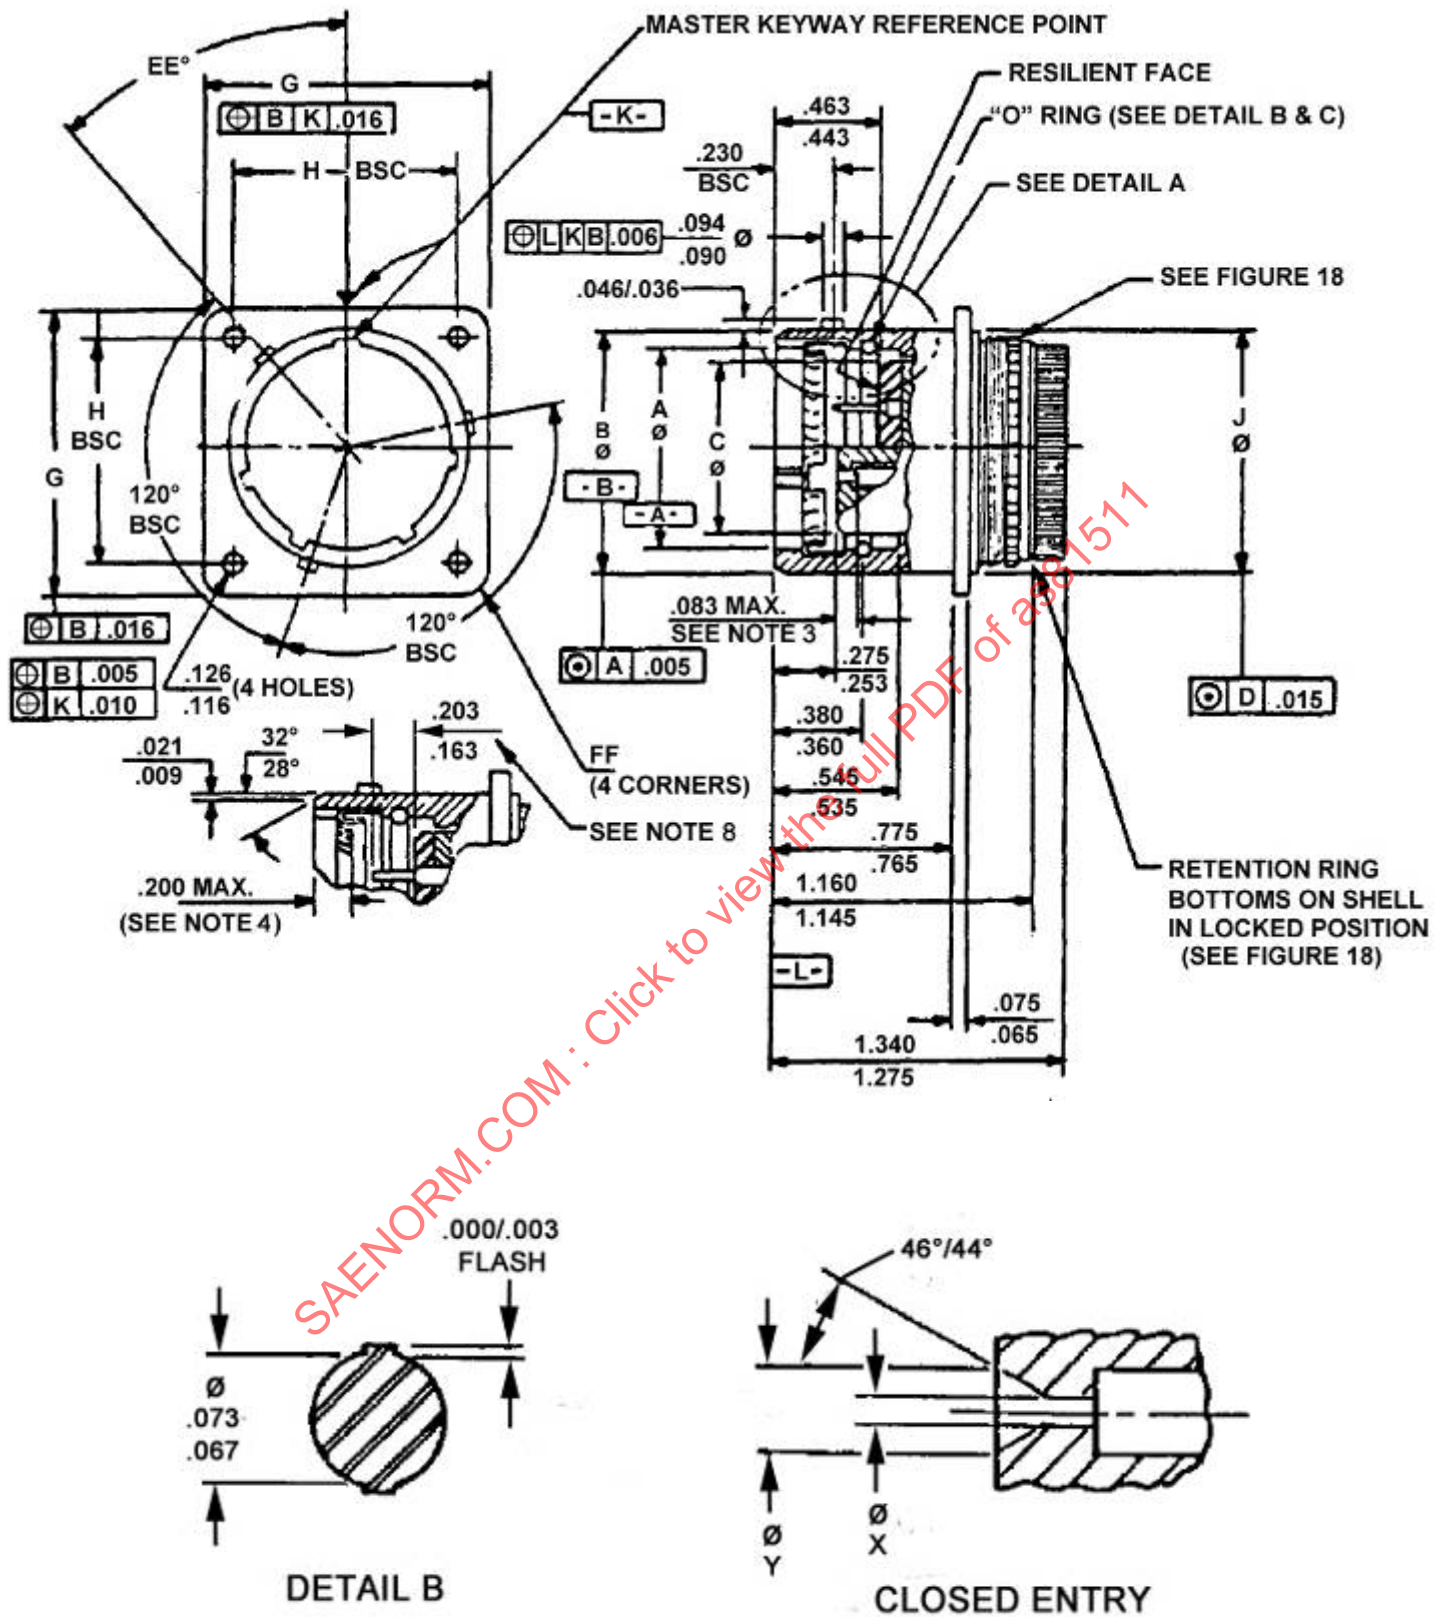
CONNECTOR, RECEPTACLE, ELECTRICAL, FLANGE MOUNT (SERIES 2)
